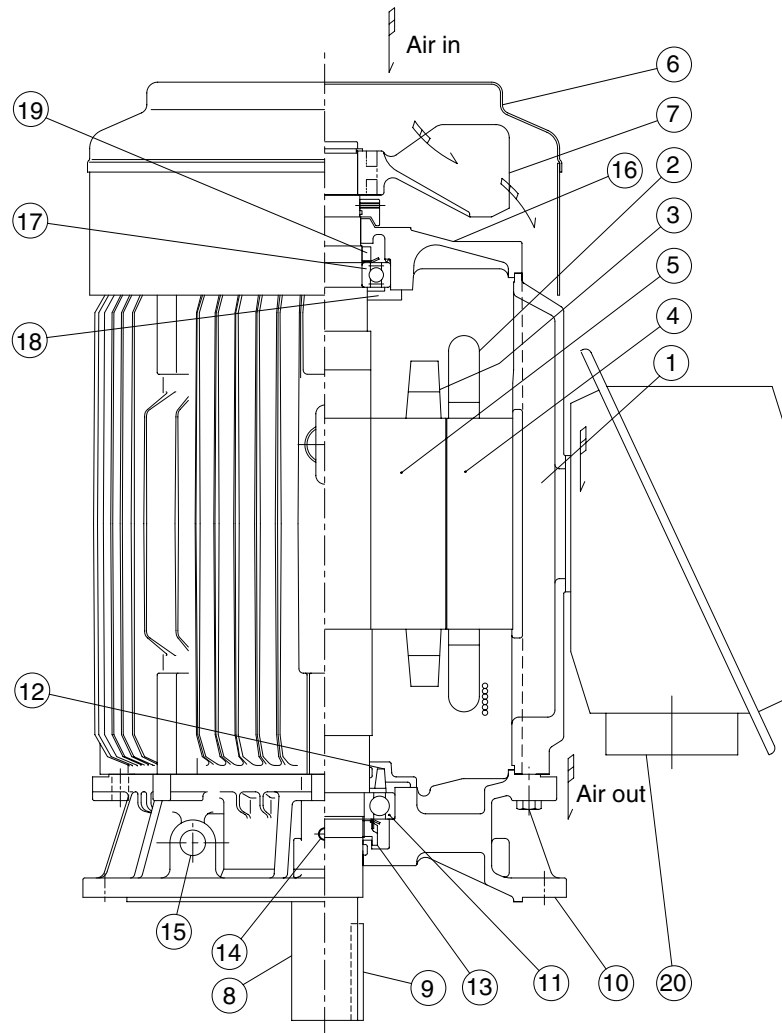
Section Drawing of Vertical flange mount (Frame size 250)
